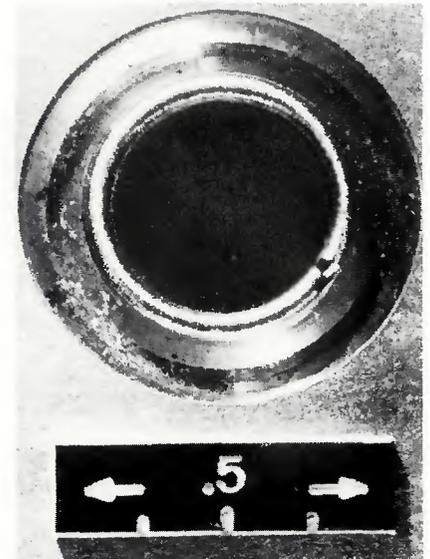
Closeup of a 0.375 in. diam tube-to-header weld showing the machined groove
